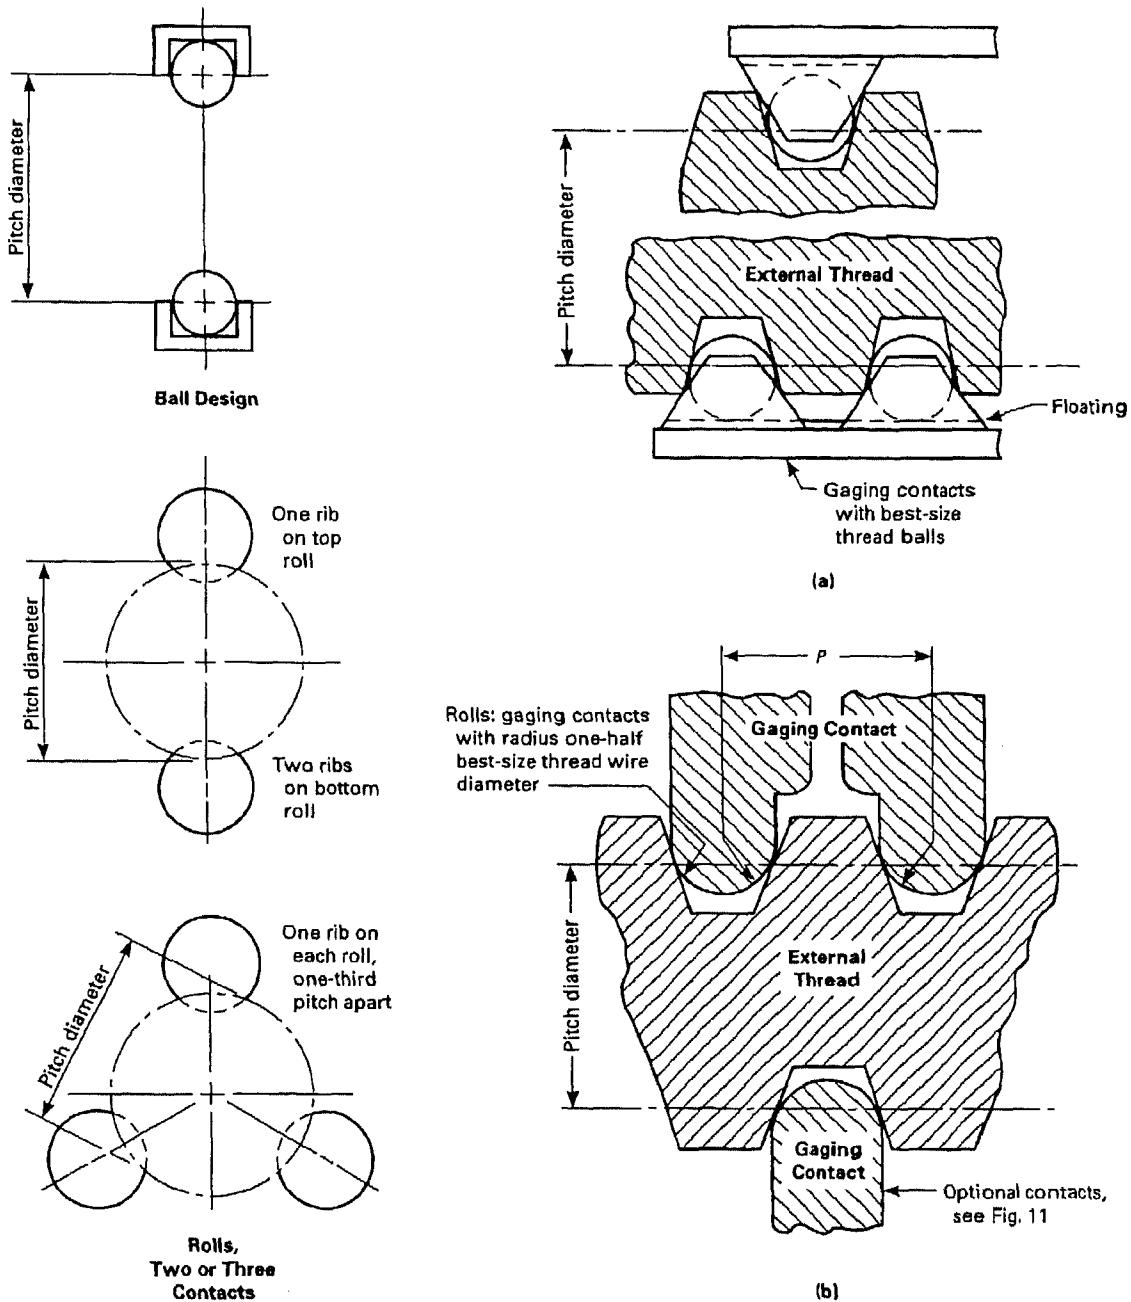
INDICATING THREAD GAGES — MINIMUM-MATERIAL THREAD GROOVE DIAMETER LIMIT AND SIZE FOR EXTERNAL THREAD
